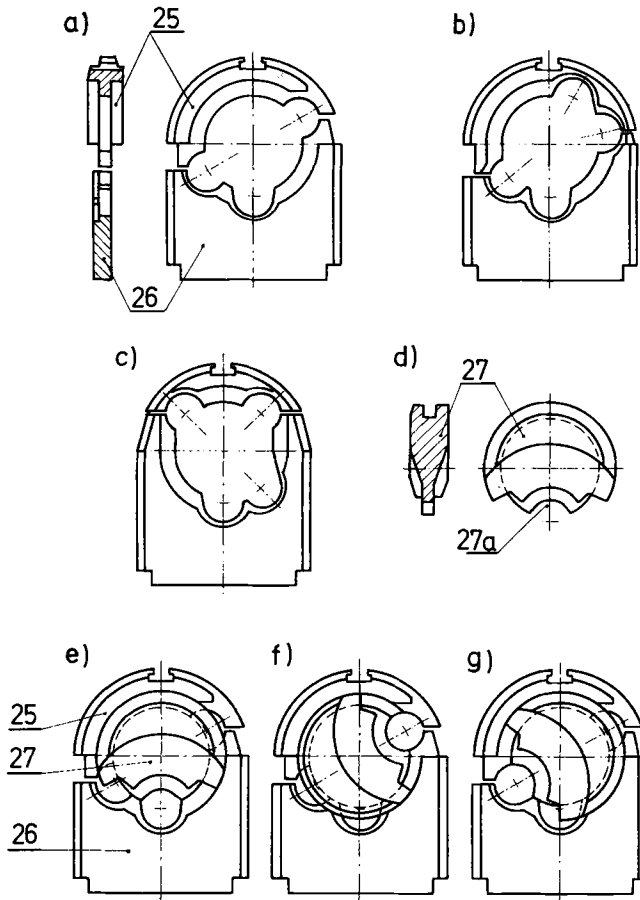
Angle die insert set: (a) Top and bottom angle die insert designed for a six-throw crankshaft; (b) Top and bottom angle die insert designed for a seven-throw crankshaft; (c) Top and bottom angle die insert designed for an eight-throw crankshaft; (d) Web supporting plate; (e) Angle die inserts (shown in Fig. 6a), the web supporting plate placed as shown in Fig. 5a; (f) and (g) The angle die insert set shown in Fig. 6e (web supporting plate situated for fixing the proper angle of torsion between the finished crank throw and the just-forged crank throw).
